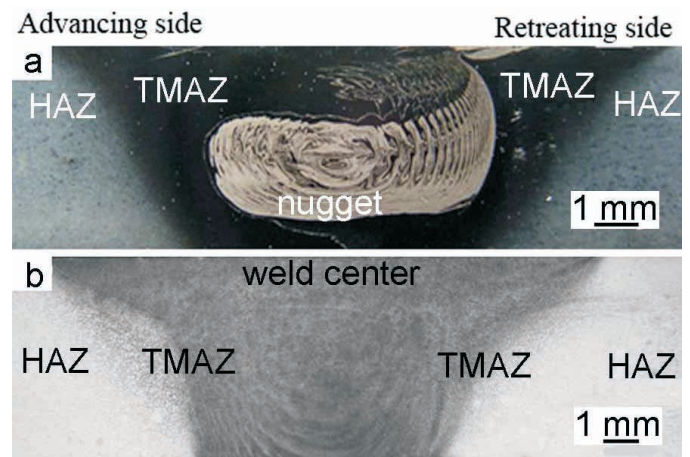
Weld appearance at low magnification; LM: a) alloy 6061, b) alloy 7136
